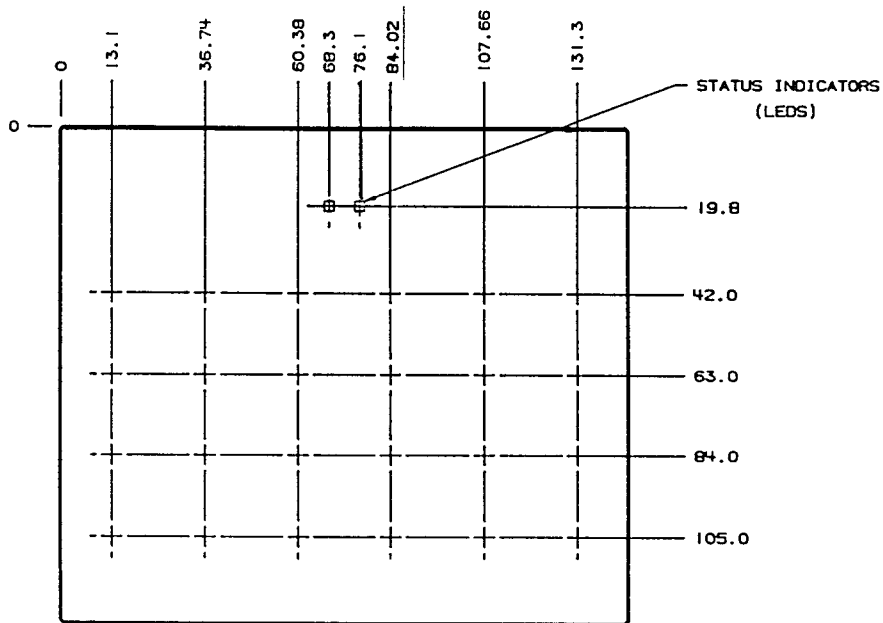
Front Panel 24 Component Gridwork, 3/8 Module
